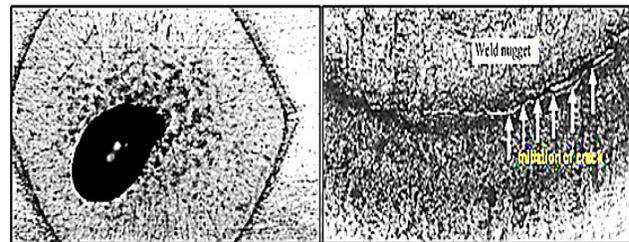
Fig.IV Cracking and cavitation's in weld nugget [5].
